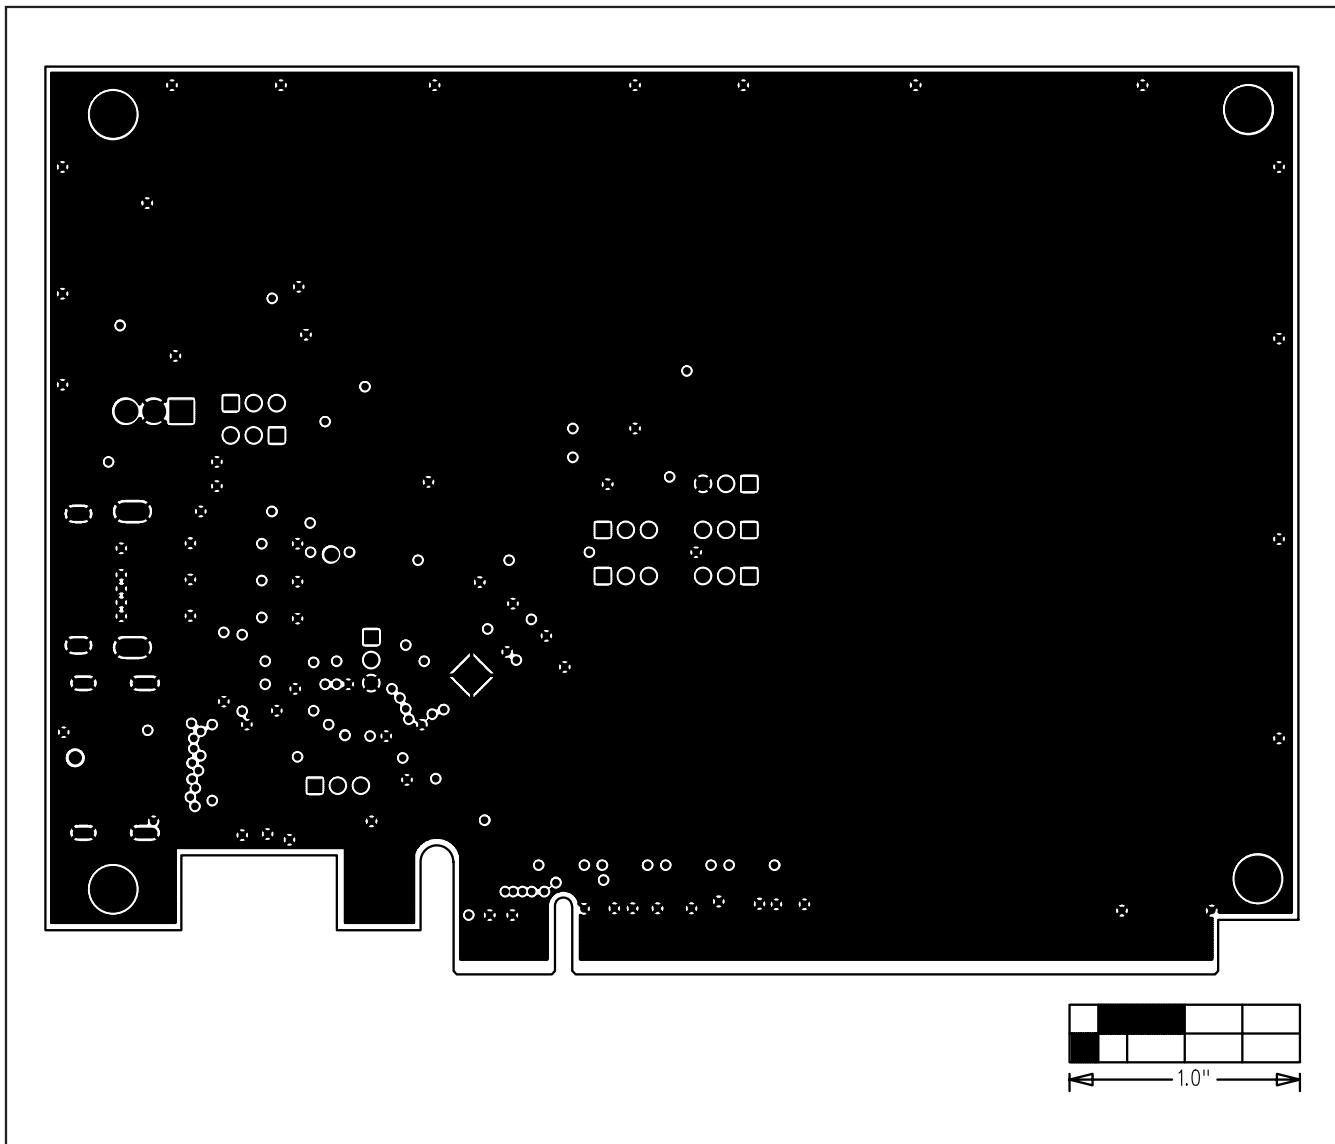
MAX9406 EV Kit PCB Layout—Ground Layer 2
